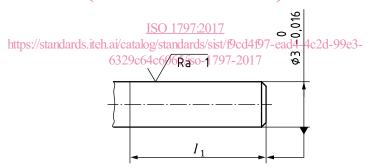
Dimensions, tolerances and surface roughness for Type 4 shank
